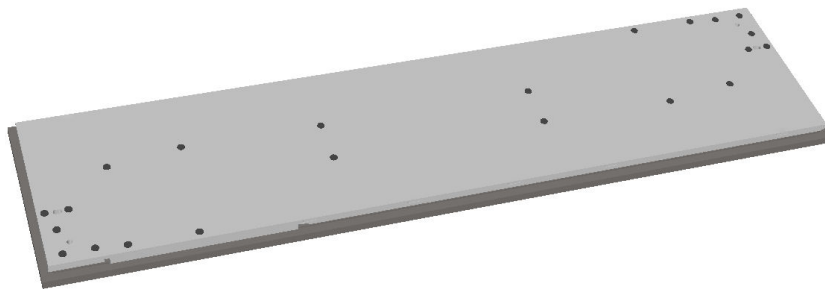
The fixture layout used for the second machining step: 22 screws
